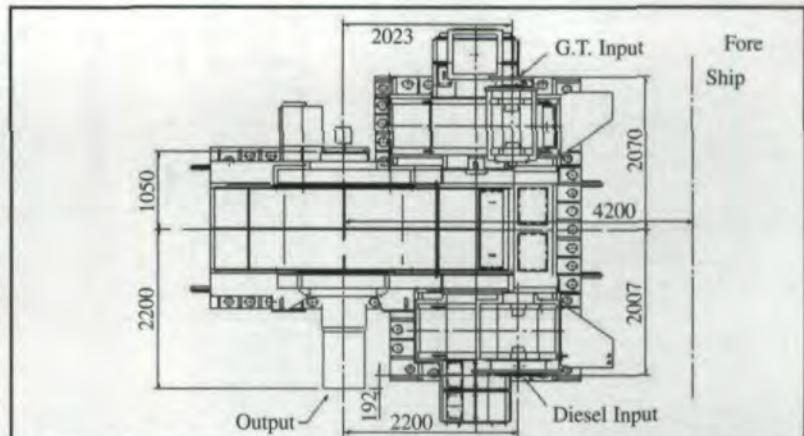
Top view of the portside gearbox. All dimensions in millimeters.
